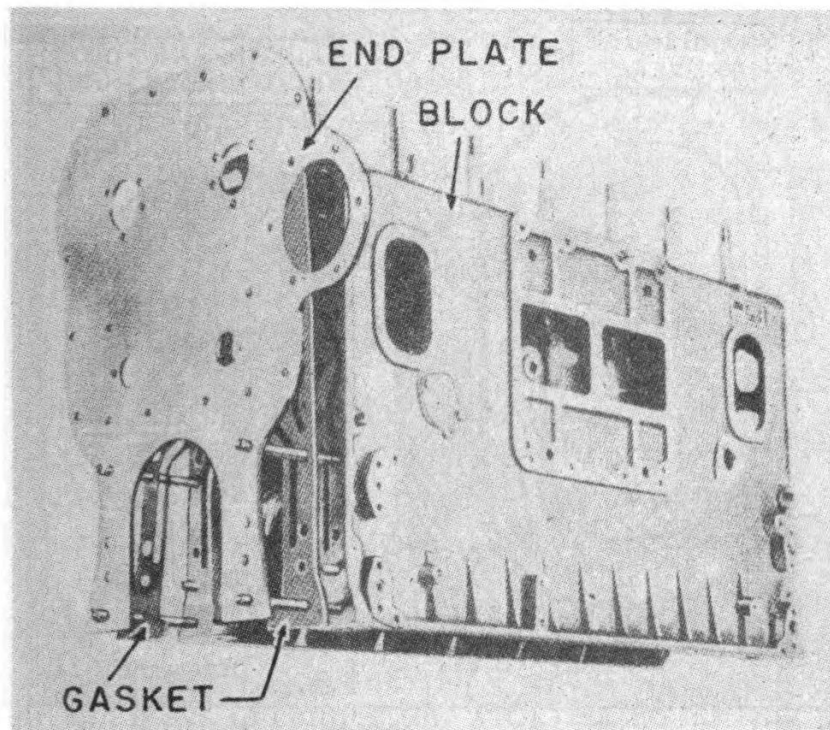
Front end plate and attaching parts (GM 6-71).
